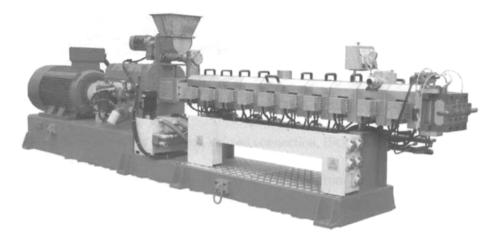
High-torque twin-screw co-rotating extruder. Reproduced with permission from Harden Industries Ltd., China.
